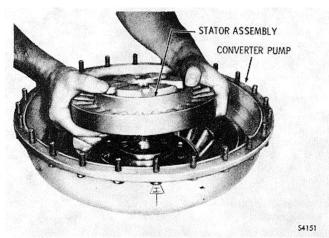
Removing (or installing) torque converter stator assembly (AT 543)
